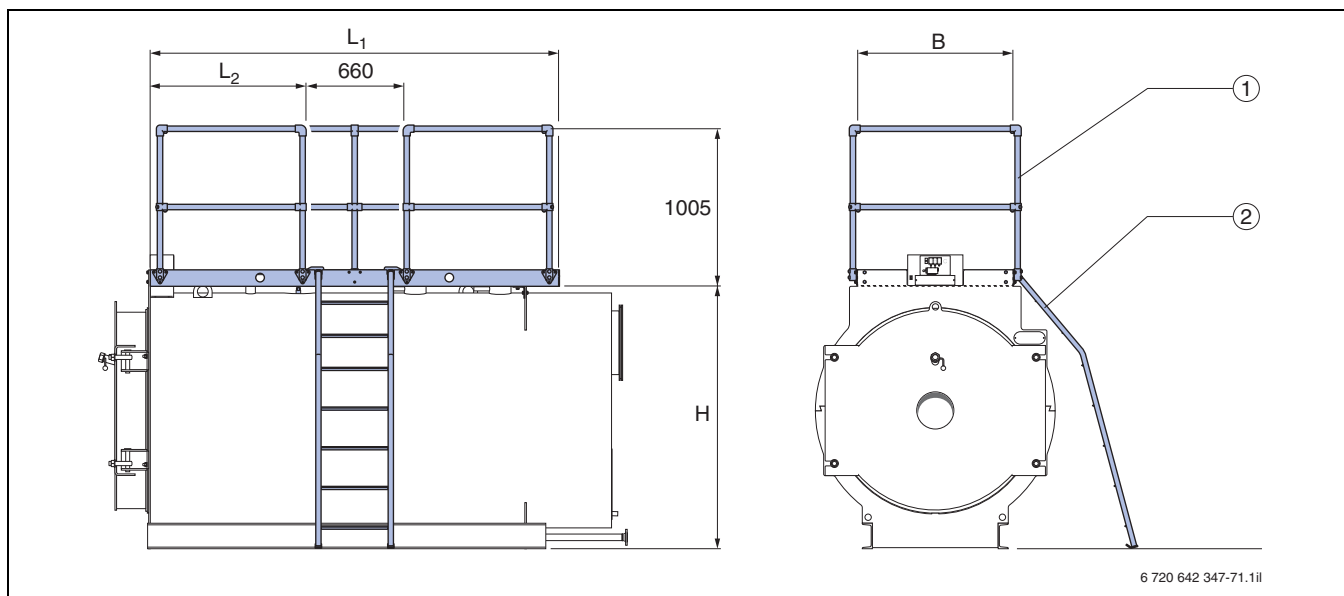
Dimensions of the walk-on boiler cover for UNIMAT UT-L boilers; rail and ladder are optional (dimensions in mm)
